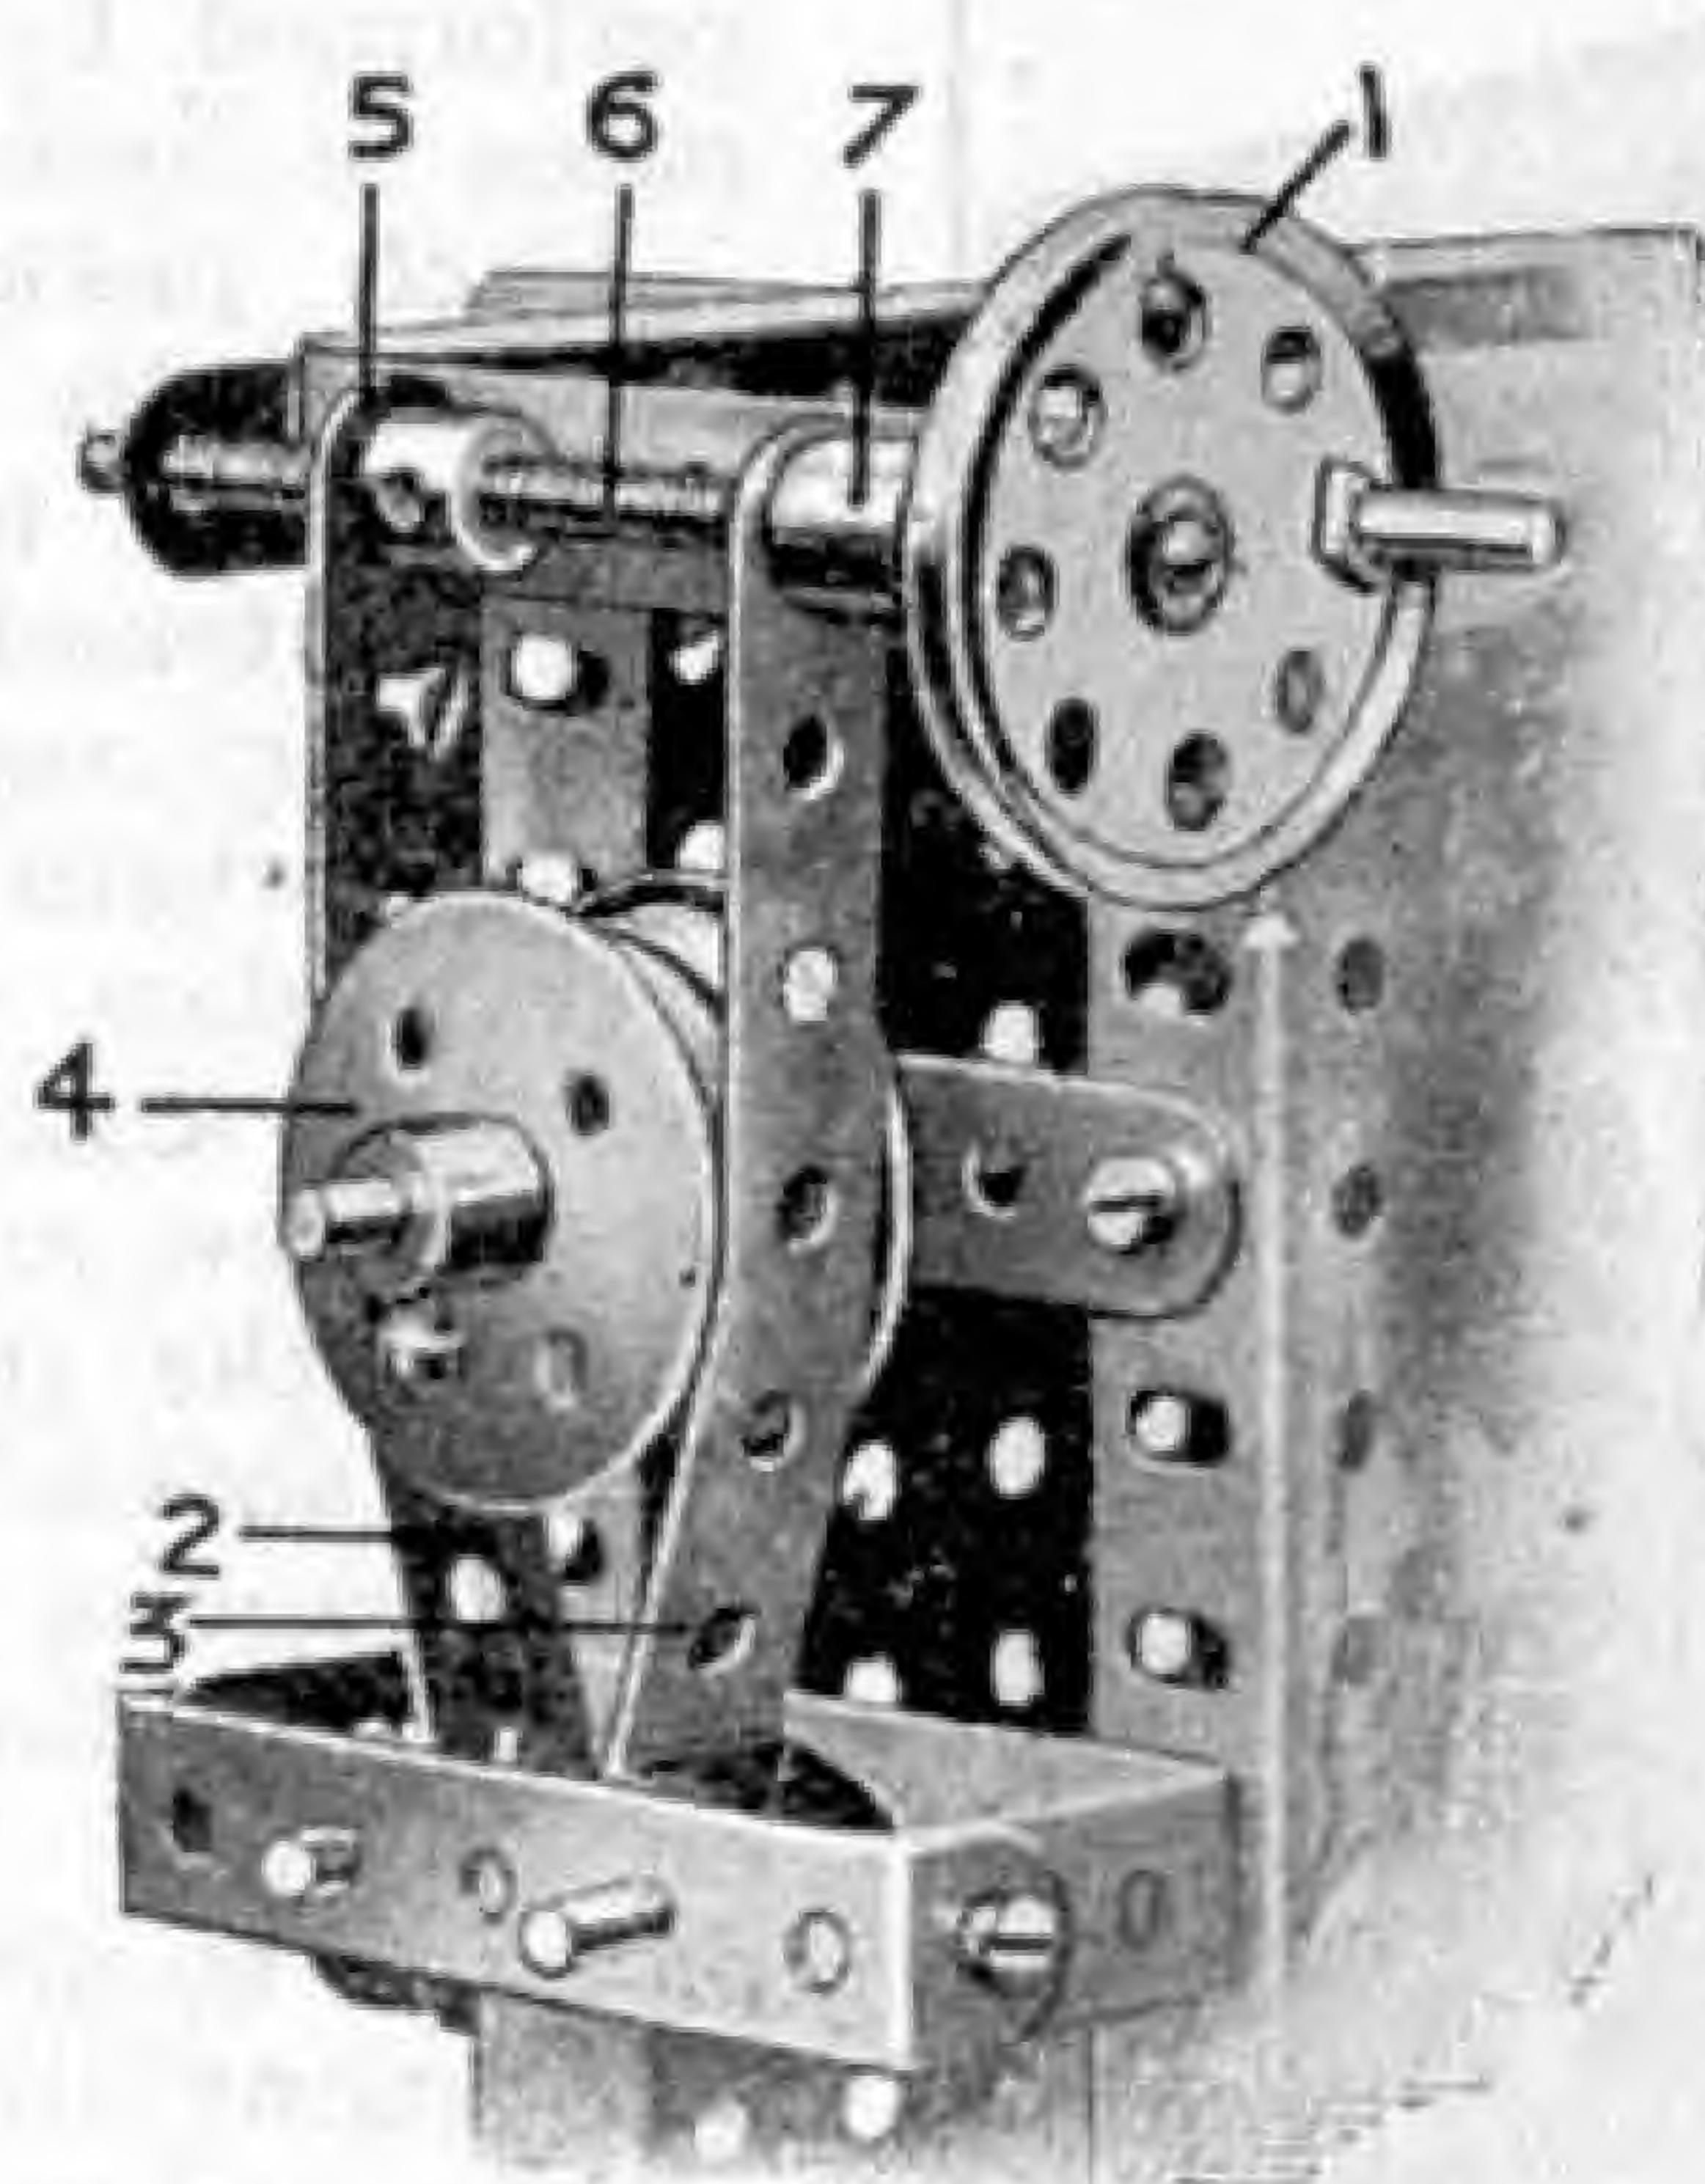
This simple brake illustrates one of the many uses for a Meccano Screwed Rod.
